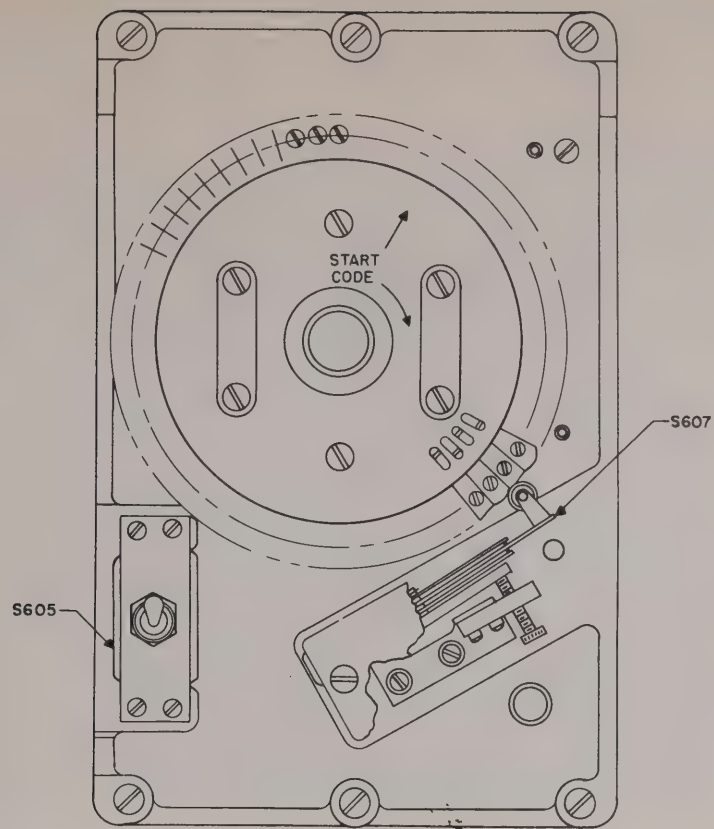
Coder-Indicator Tone Wheel Assembly
